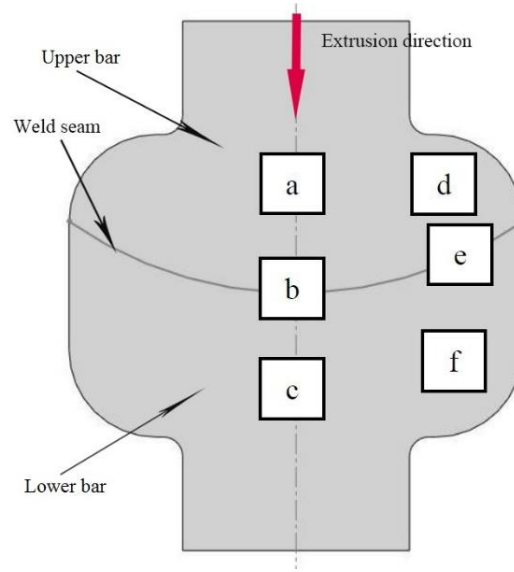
Six zones in the barreled section of the upper bar and lower bar for polarized light microscopy. (a) inflowing zone (IZ), (b) weld seam central zone (WCZ), (c) outflowing zone (OZ), (d) shear concentration zone (SCZ), (e) weld seam edge zone (WEZ) and (f) dead zone (DZ).
